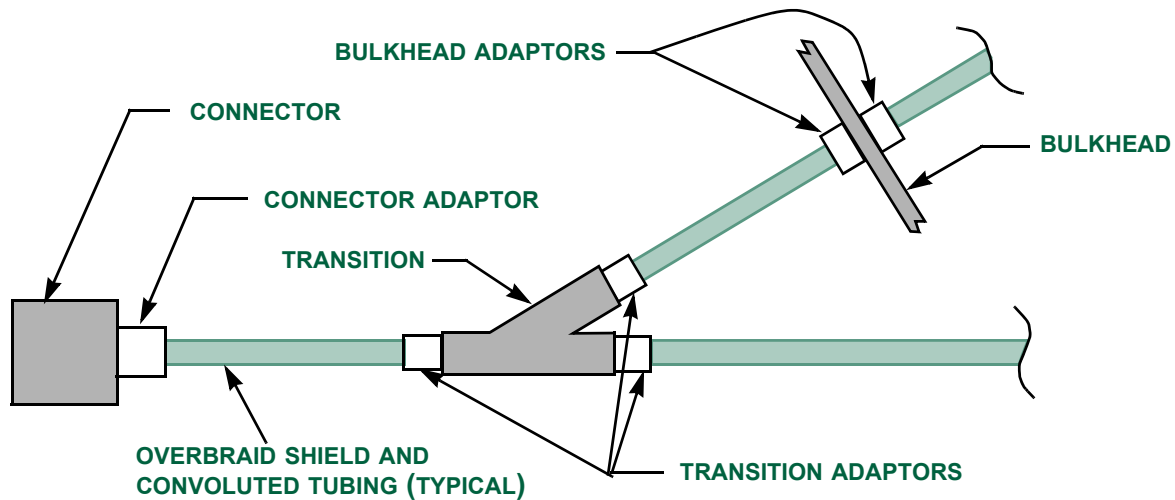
CONDUIT SYSTEM (TYP.)
